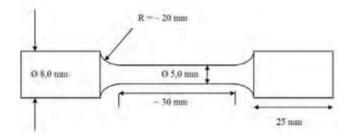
Illustration of the dimensions for the tensile test specimens.
